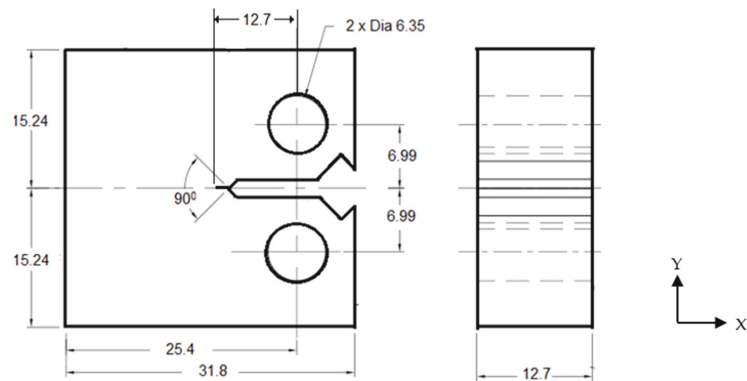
Tensile test specimen. All dimensions are in mm.
